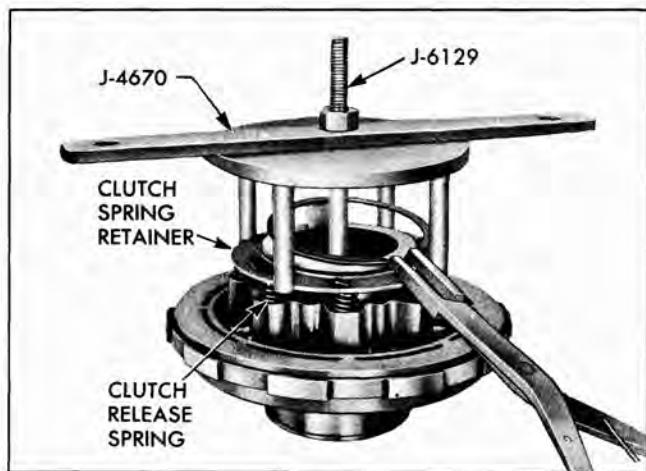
Installing Rear Clutch Release Spring Retainer Snap Ring
